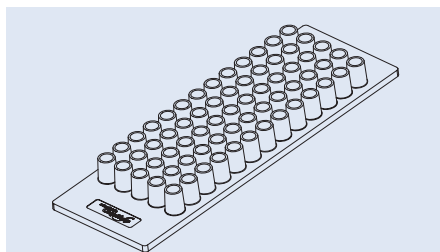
65-well chip – microscopy slide format – FI. 0383
